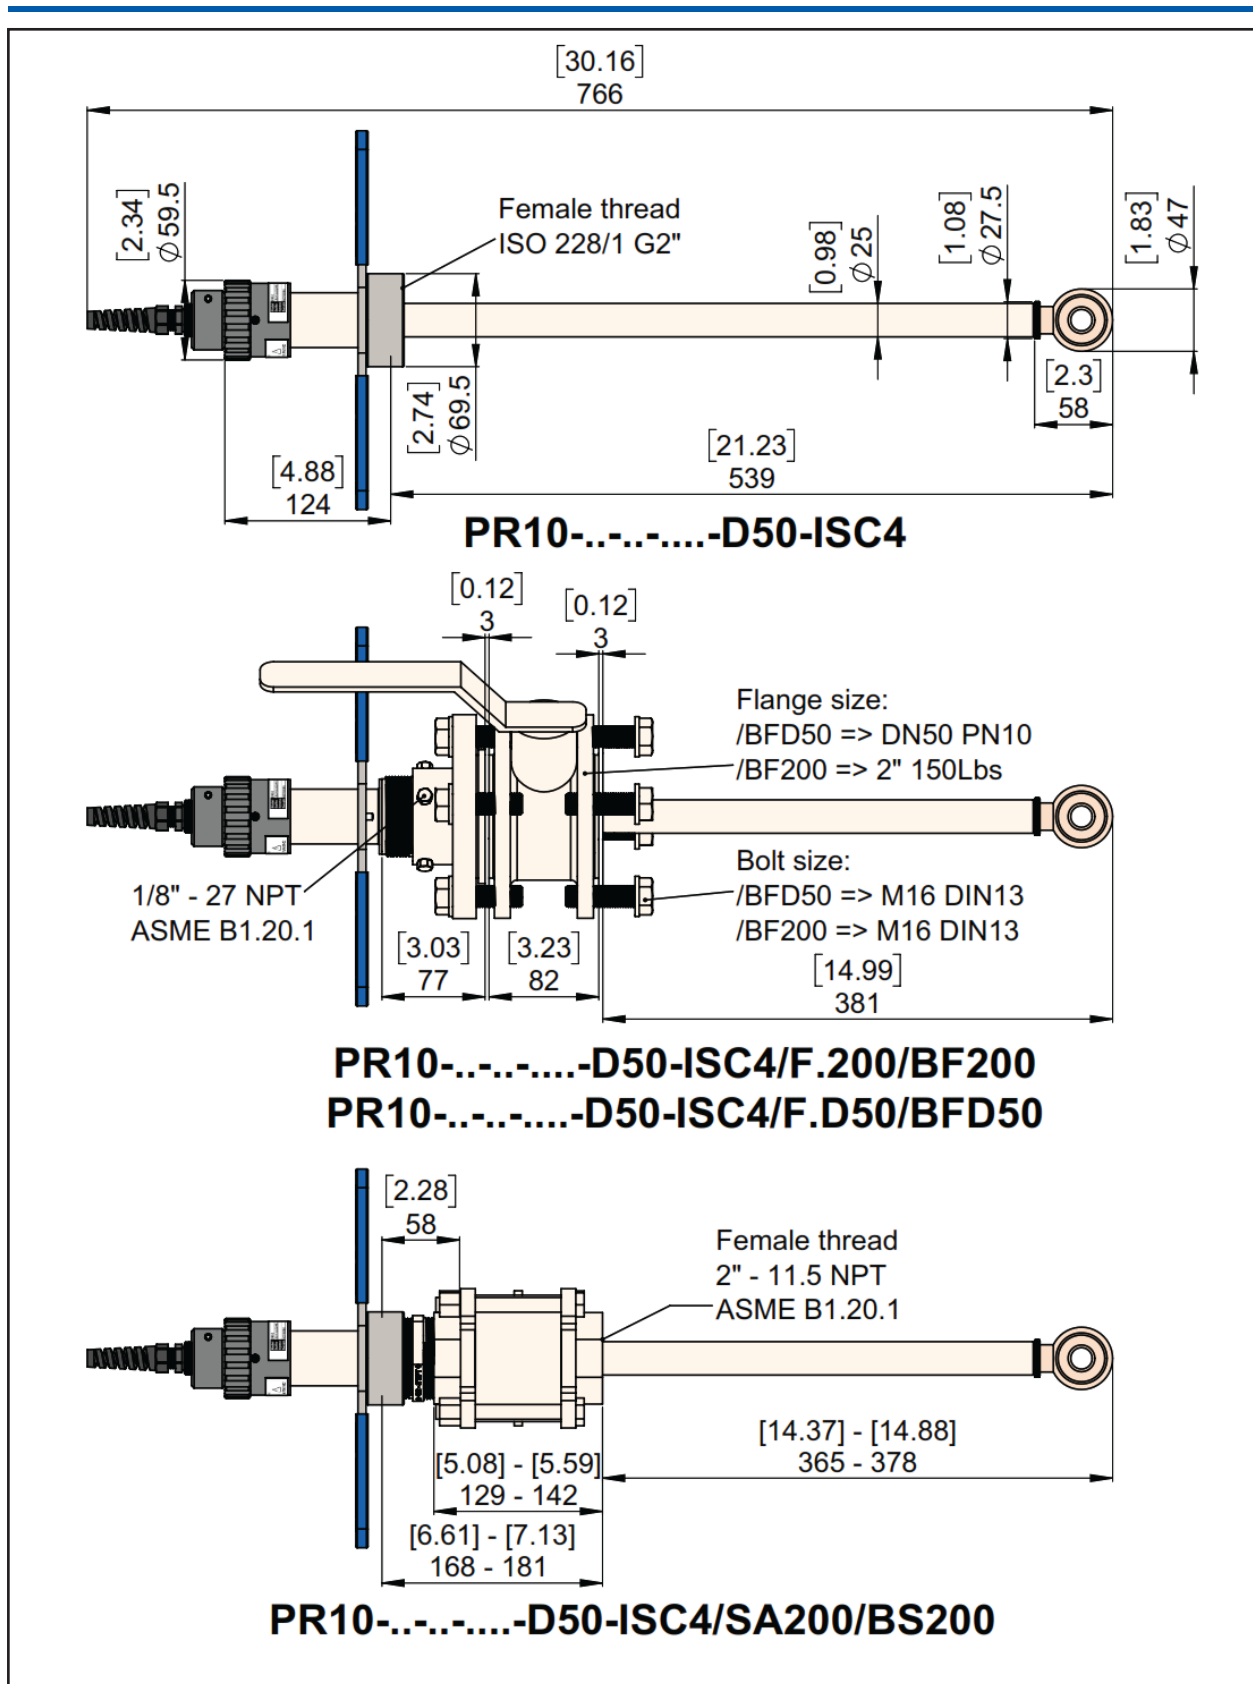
Dimensional drawing PR10...-D50 with mounted ISC40 sensor - units in mm [inch]
